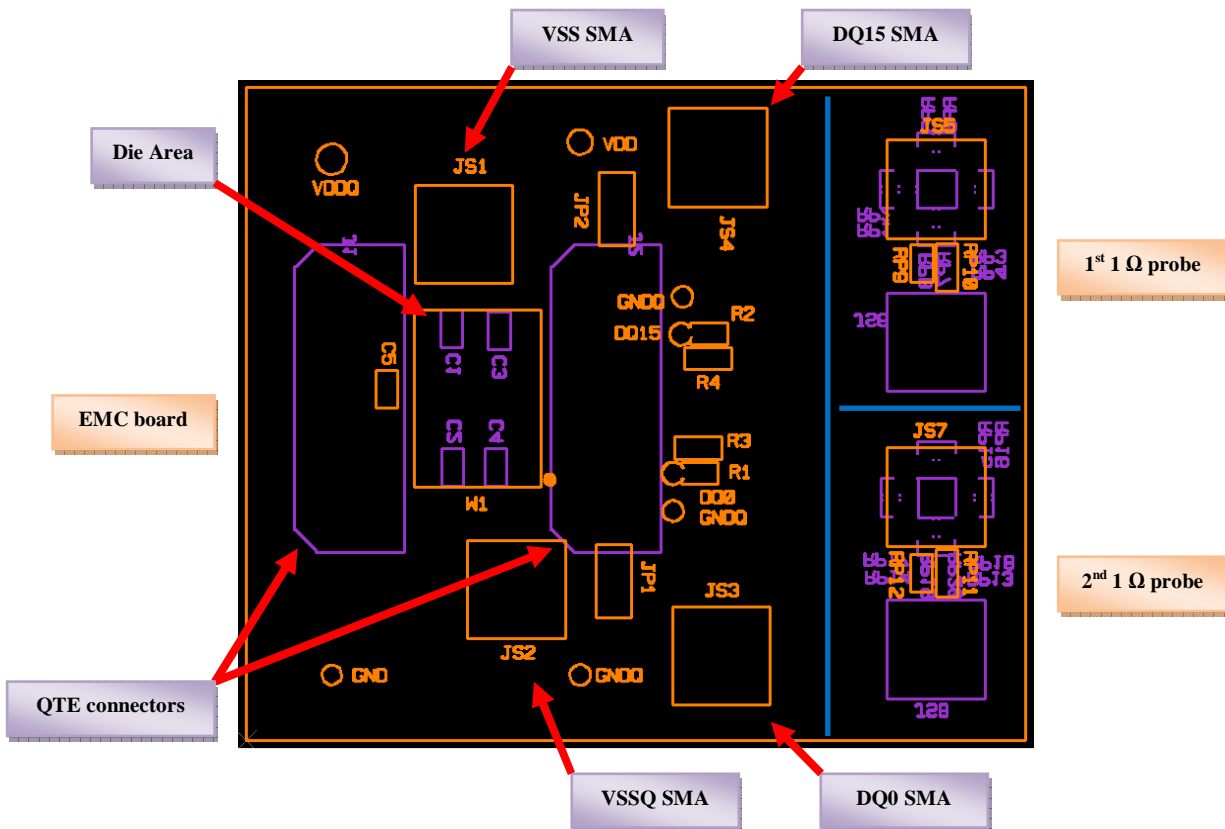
EMC board. Silkscreen Top and Bottom Layers.
